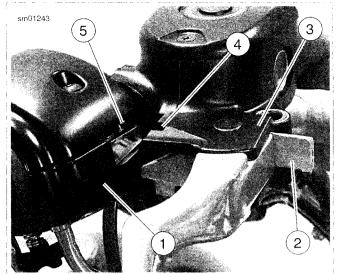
Install 5/32 in. (4 mm) Cardboard Insert Before Installing Master Cylinder Assembly
